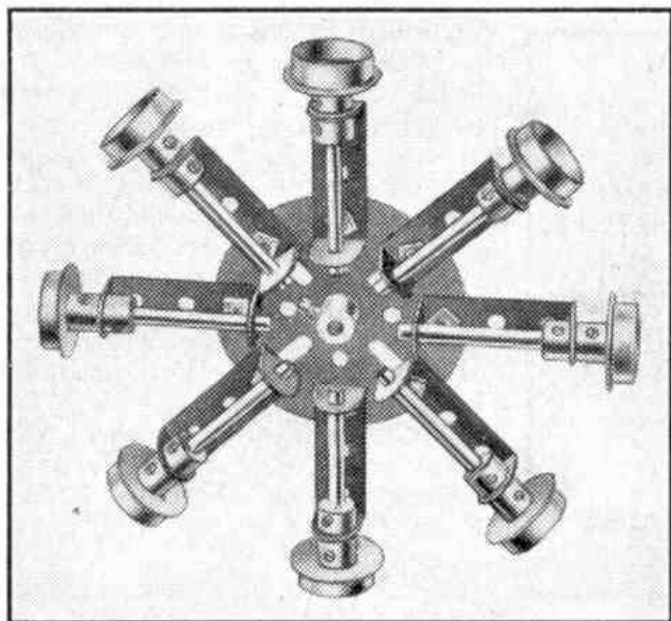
The spider of the roller bearing on which the superstructure rotates.
